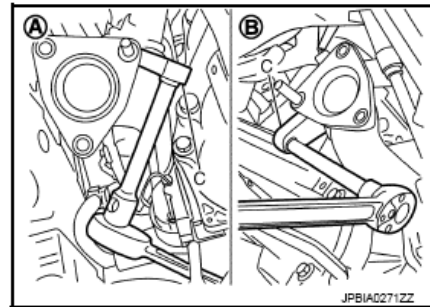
Removing Air Fuel Ratio Sensor 1 Using Wrench
